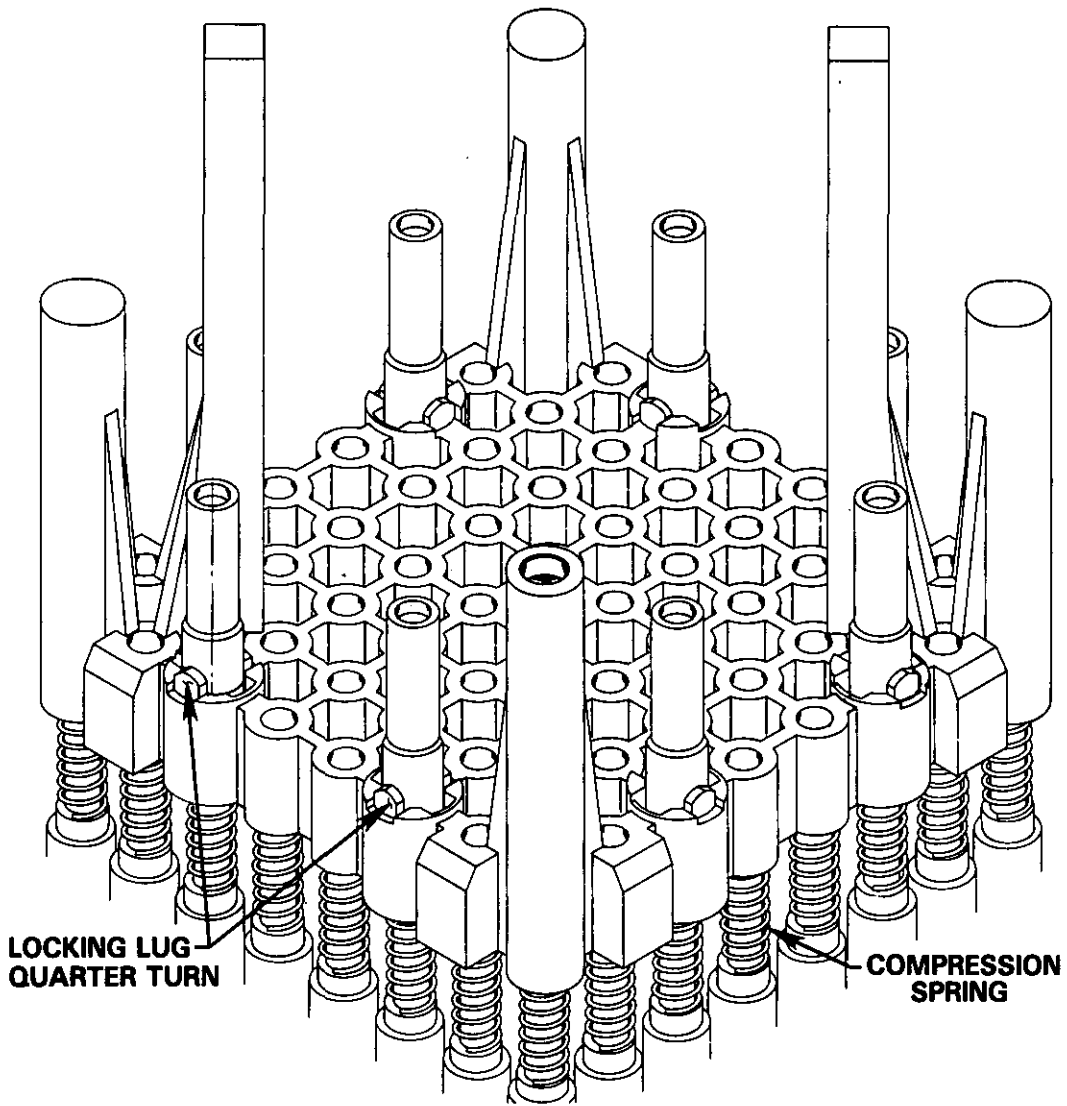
8×8 BWR REMOVABLE TIE PLATE
